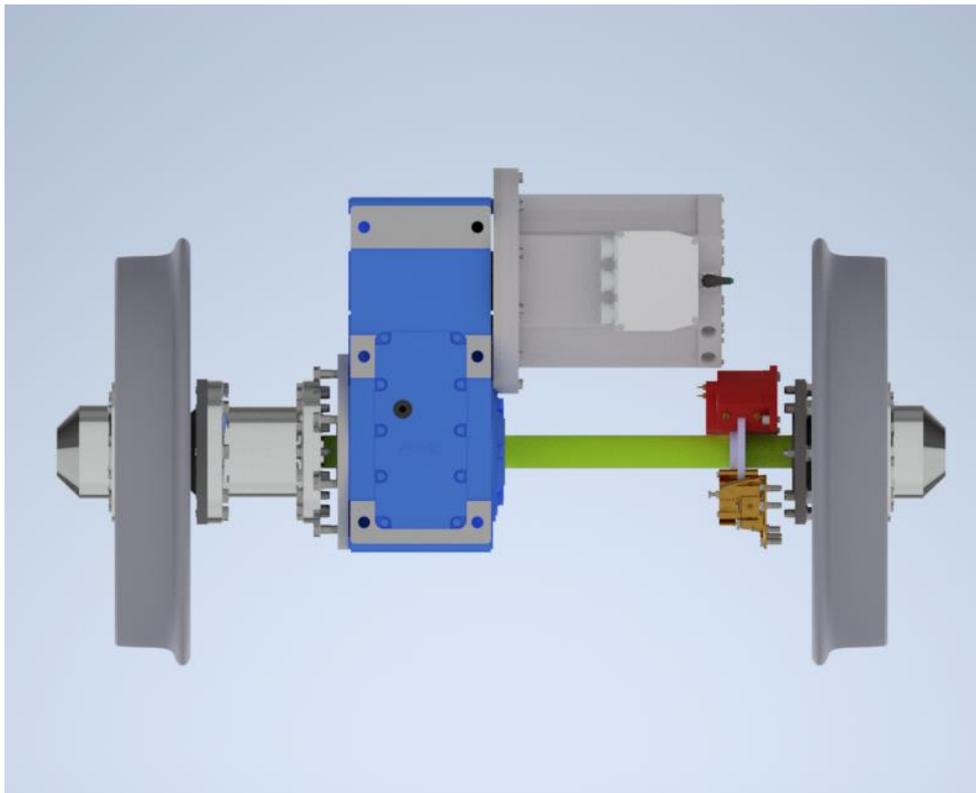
The drivetrain with motor, gear reducer, brake and wheels.
